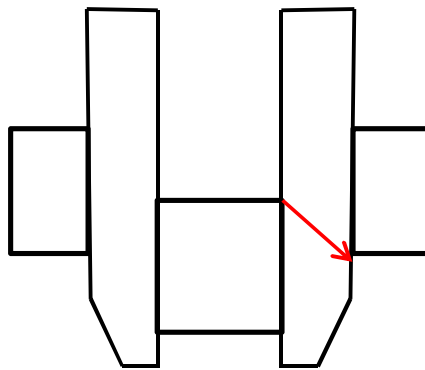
A schematic representation crack propagation direction along the crankshaft cross-section.
